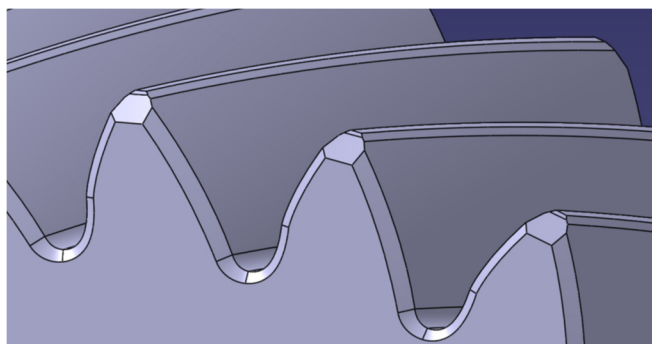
Appearance of the designed gearing considering the tip and side chamfering.
